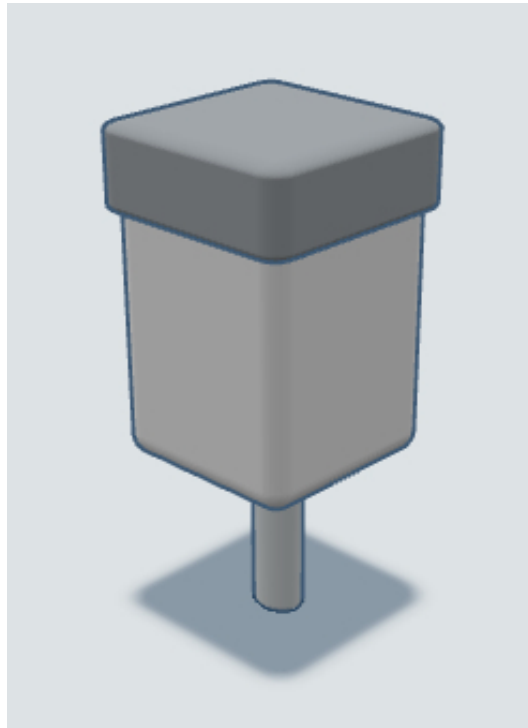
displays the 3D container design that will be 3D printed for the container of the hardware. This will contain the hardware components which are etched in a PCB board that will be used in this system. The con-
